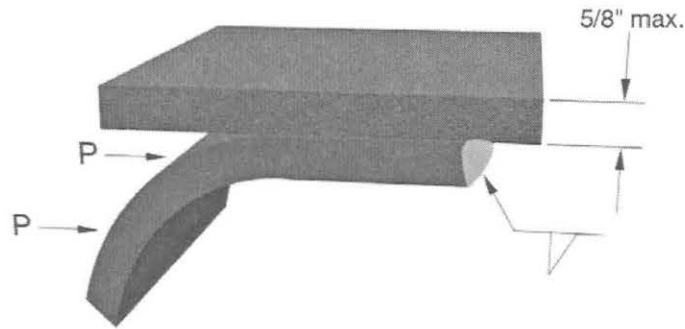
Typical Type 6 weld joint for shell-to-head.
